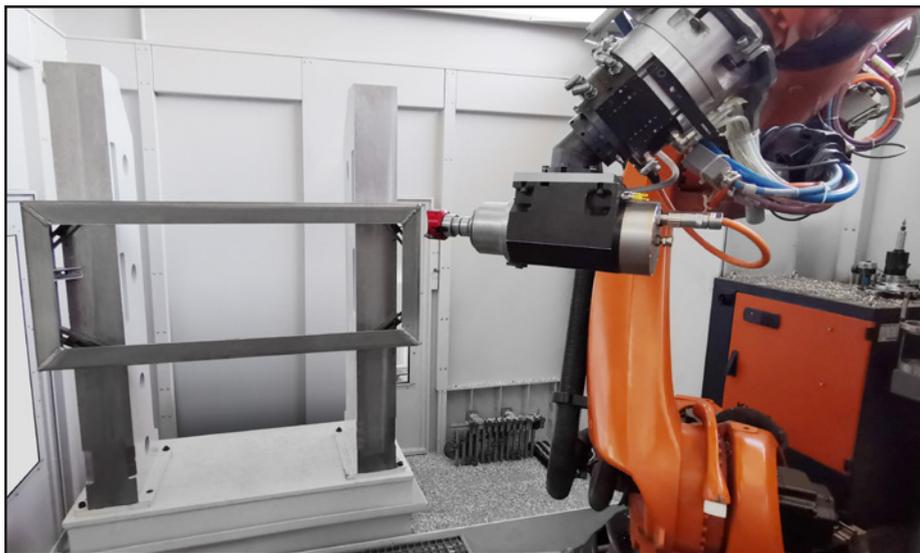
Kadia carried out extensive test machining on dummy workpieces in advance. This enabled the optimum machining parameters to be determined.
